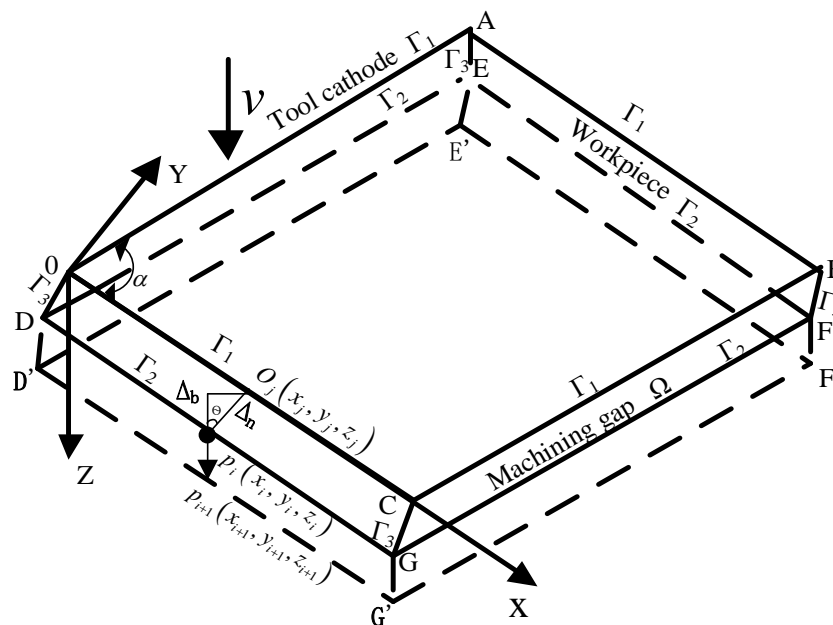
Forming schematic of a diamond hole by electrochemical machining
